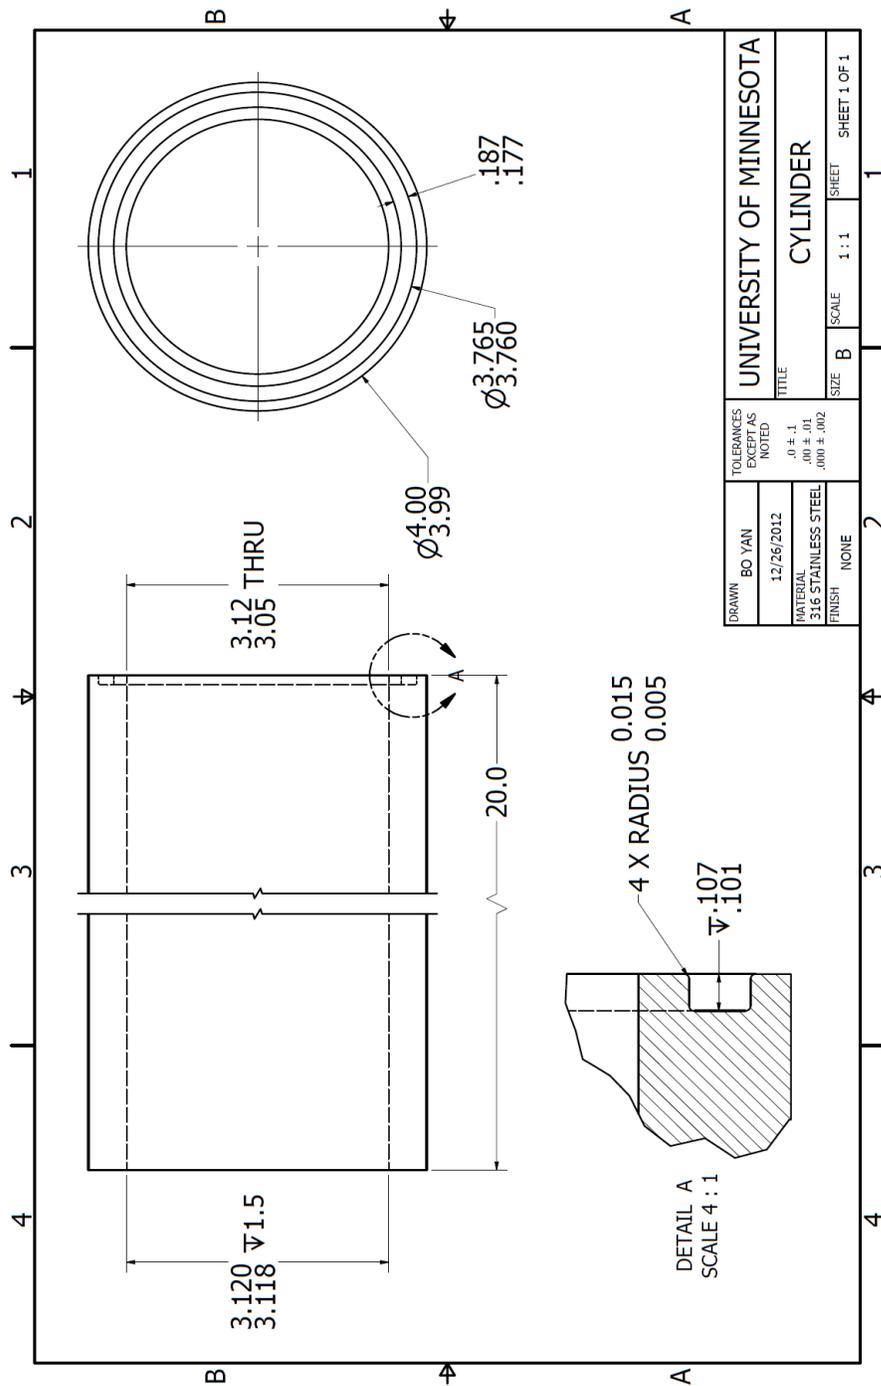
Detailed engineering drawing for the middle tube for the high pressure compression/expansion chamber
